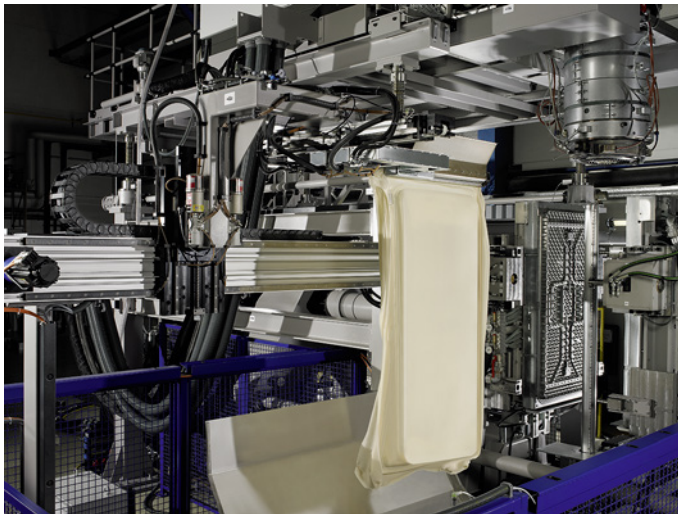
Extrusion blow molded flat panel (table top) (Image: Kautex Maschinenbau)
